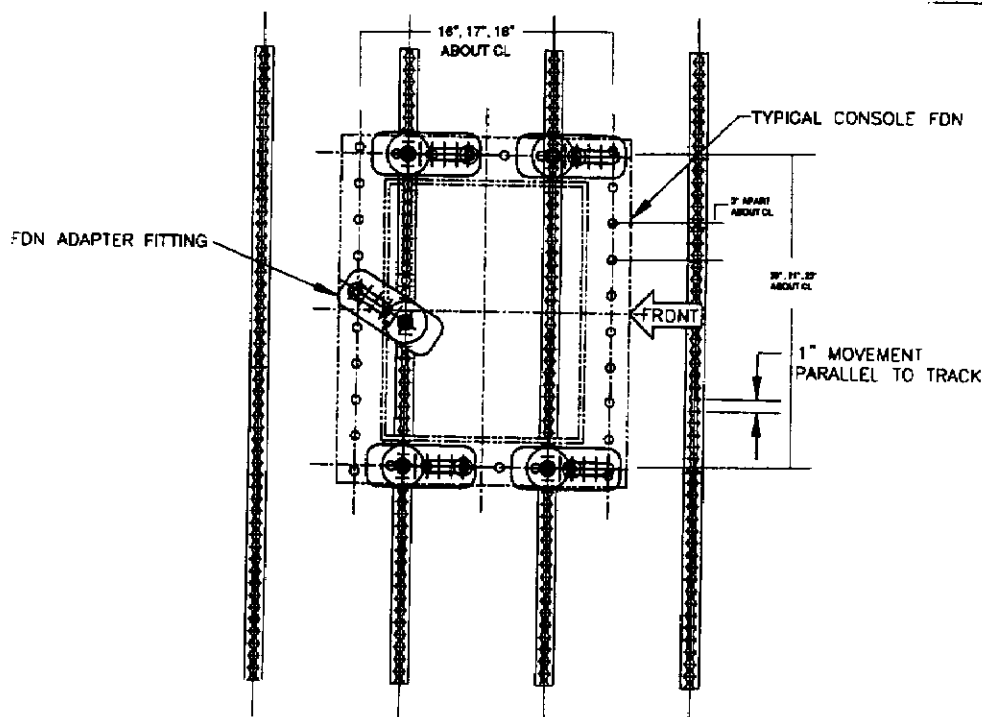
Typical Sub-Foundation Mounting Hole Location Foundation.
